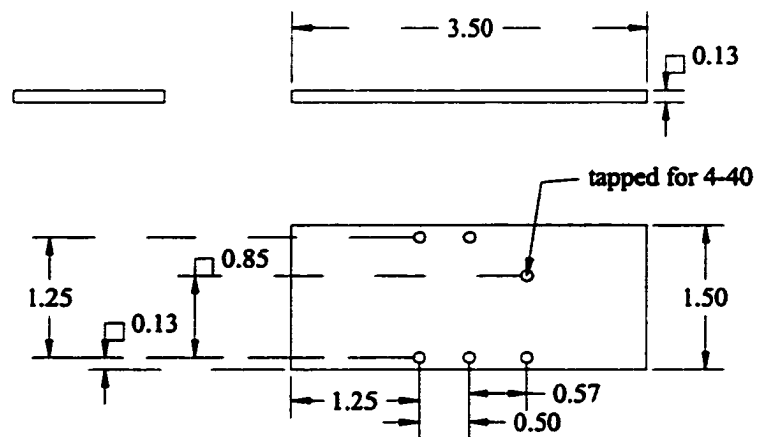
Design drawing for the sample holder/liquid nitrogen dewar mount sliding plate.
